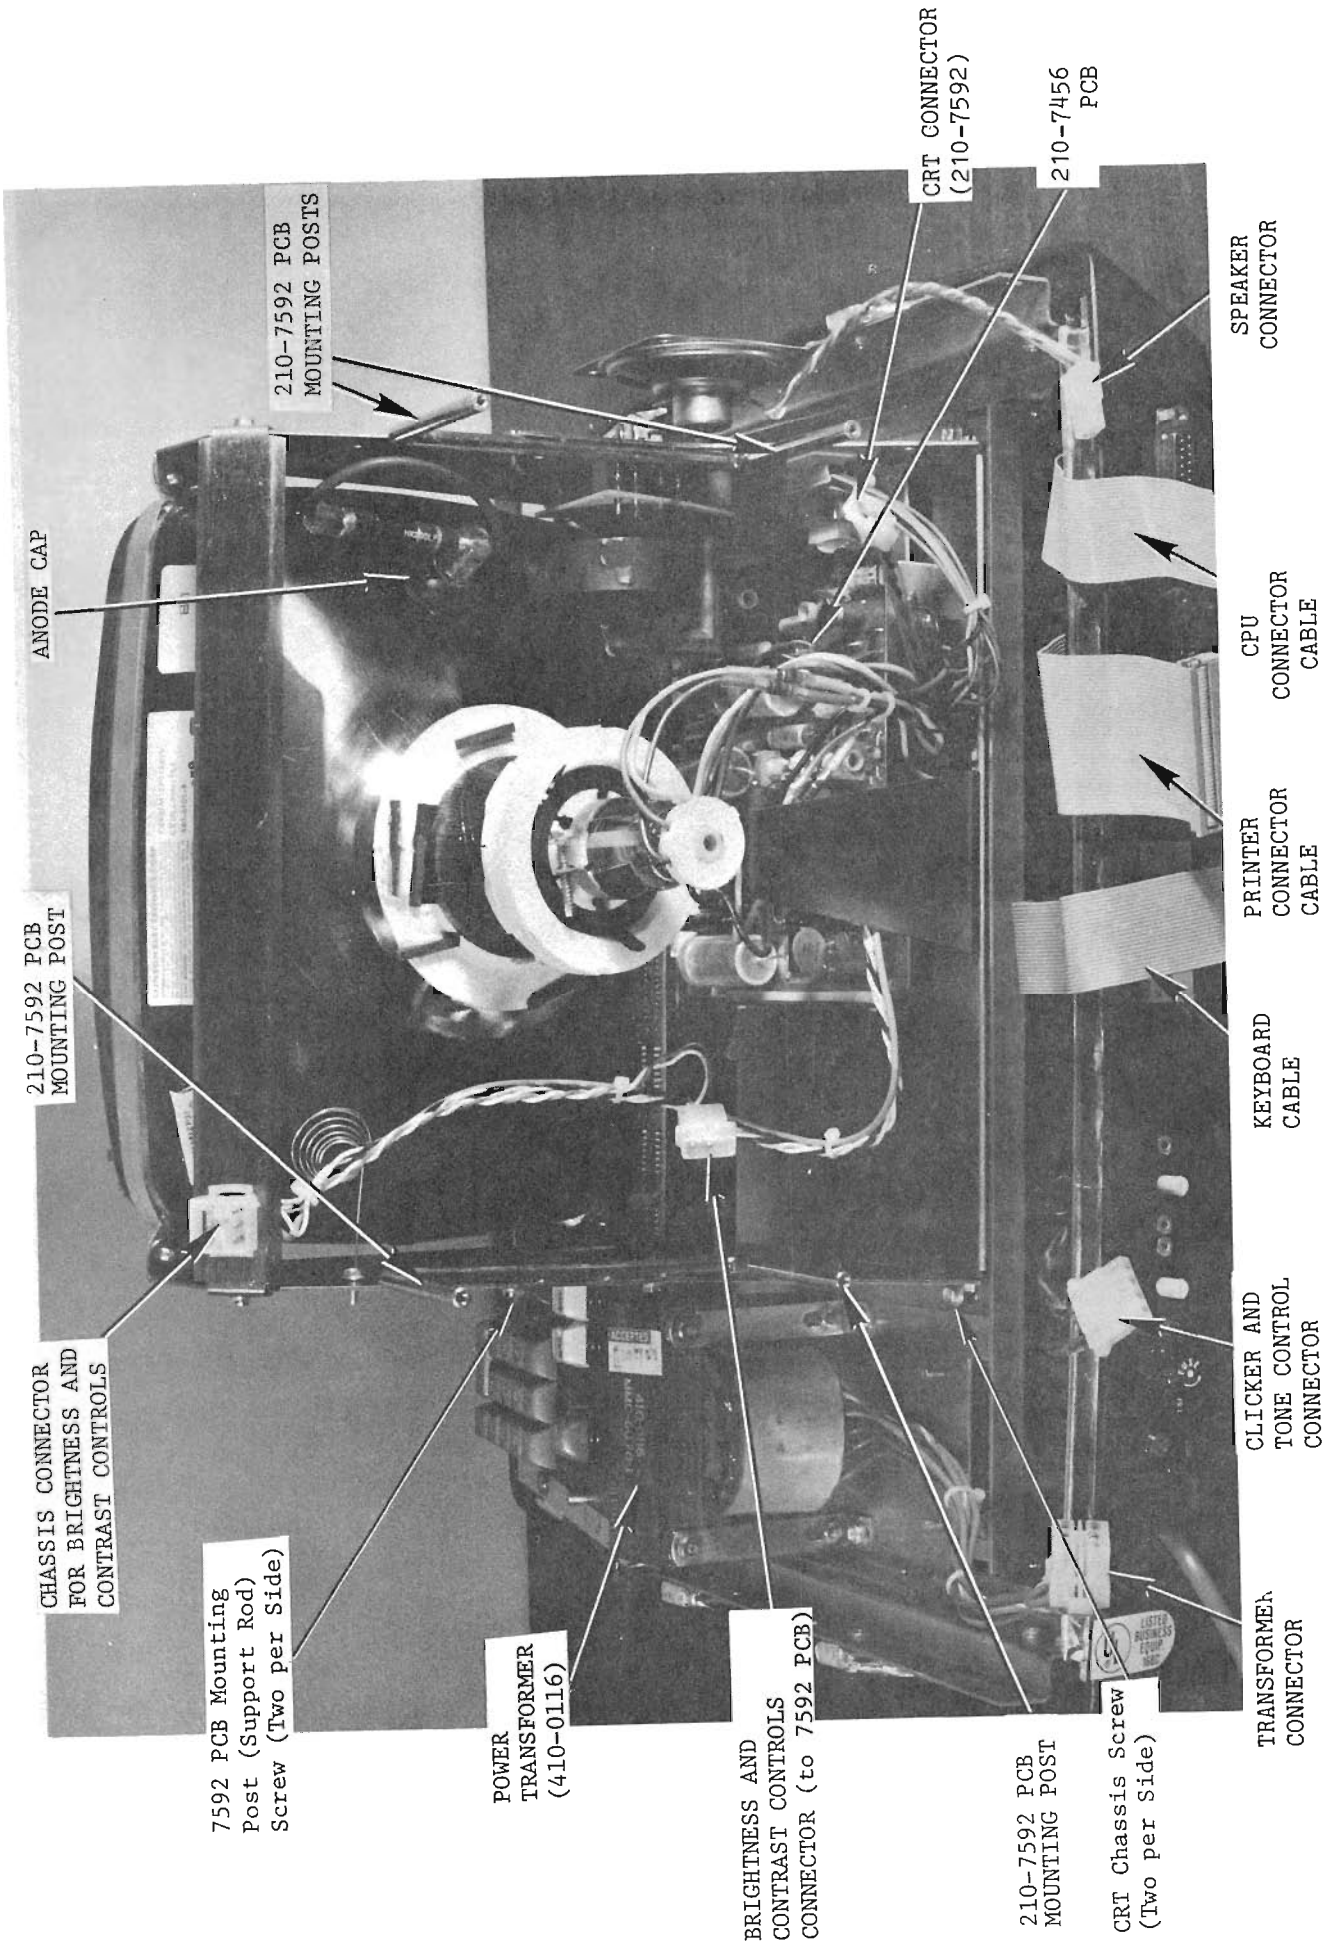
Rearview of Chassis with 7592 PCB Removed
